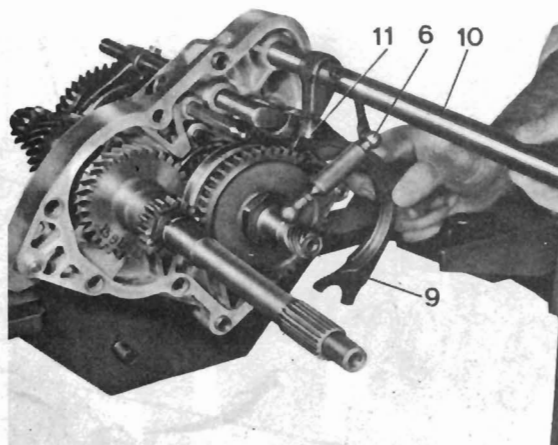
Removing 5th/reverse selector shaft (Sec 7)
